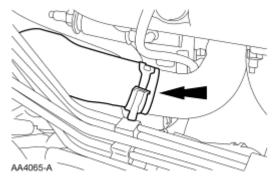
Upper Radiator Hose Courtesy of FORD MOTOR CO.
